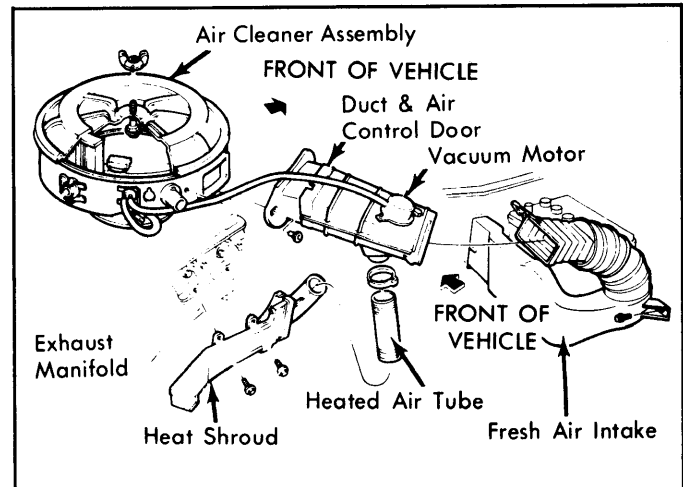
Typical Vacuum Type Air Cleaner Assembly
